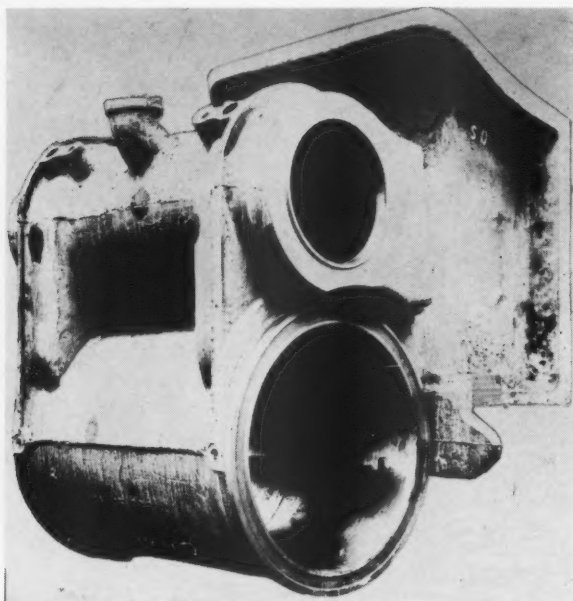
LOCOMOTIVE CYLINDER CASTING. WEIGHT OF ROUGH CASTING, 10,250 LB.
